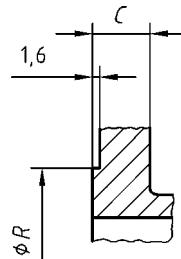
Reducing threaded and slip-on flanges, all Classes (see Table 4)Table 4 — Reducing threaded and slip-on flanges, all Classes
